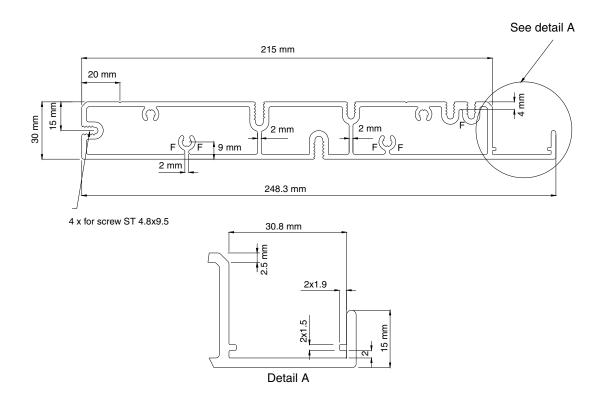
Al-Profile for DIN-rail - Dimension Drawing
